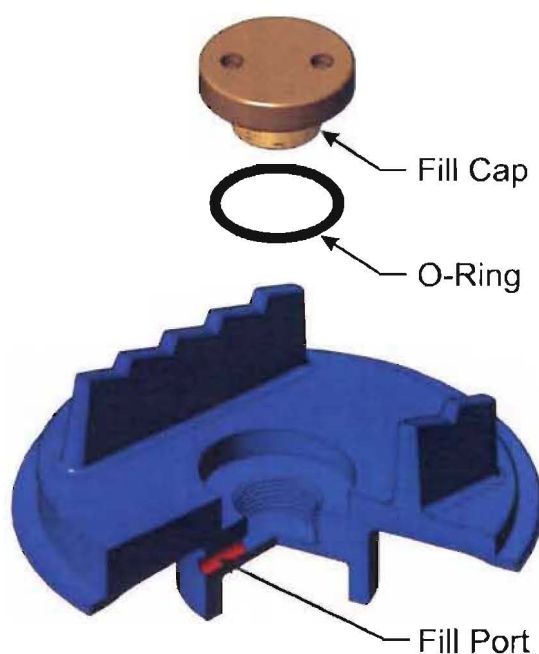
Exploded view showing the preferred endplate fill port arrangement.
